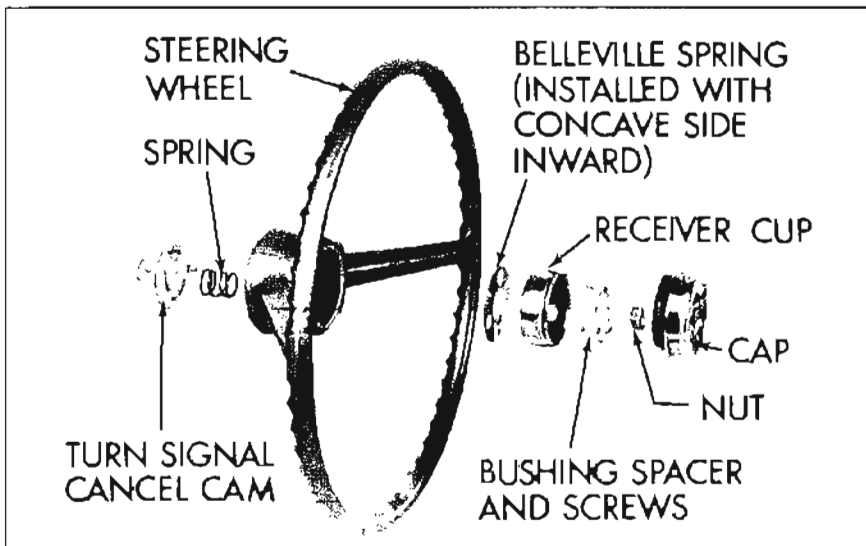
Standard Steering Wheel Installation (Non-Tilt Column)
